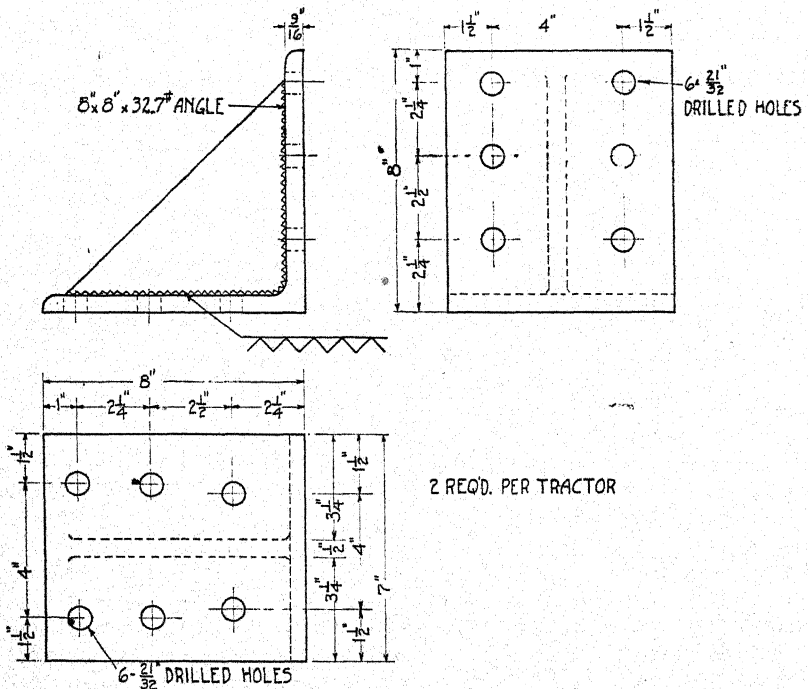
Arc welded corner angles save \$10.02 per tractor.
